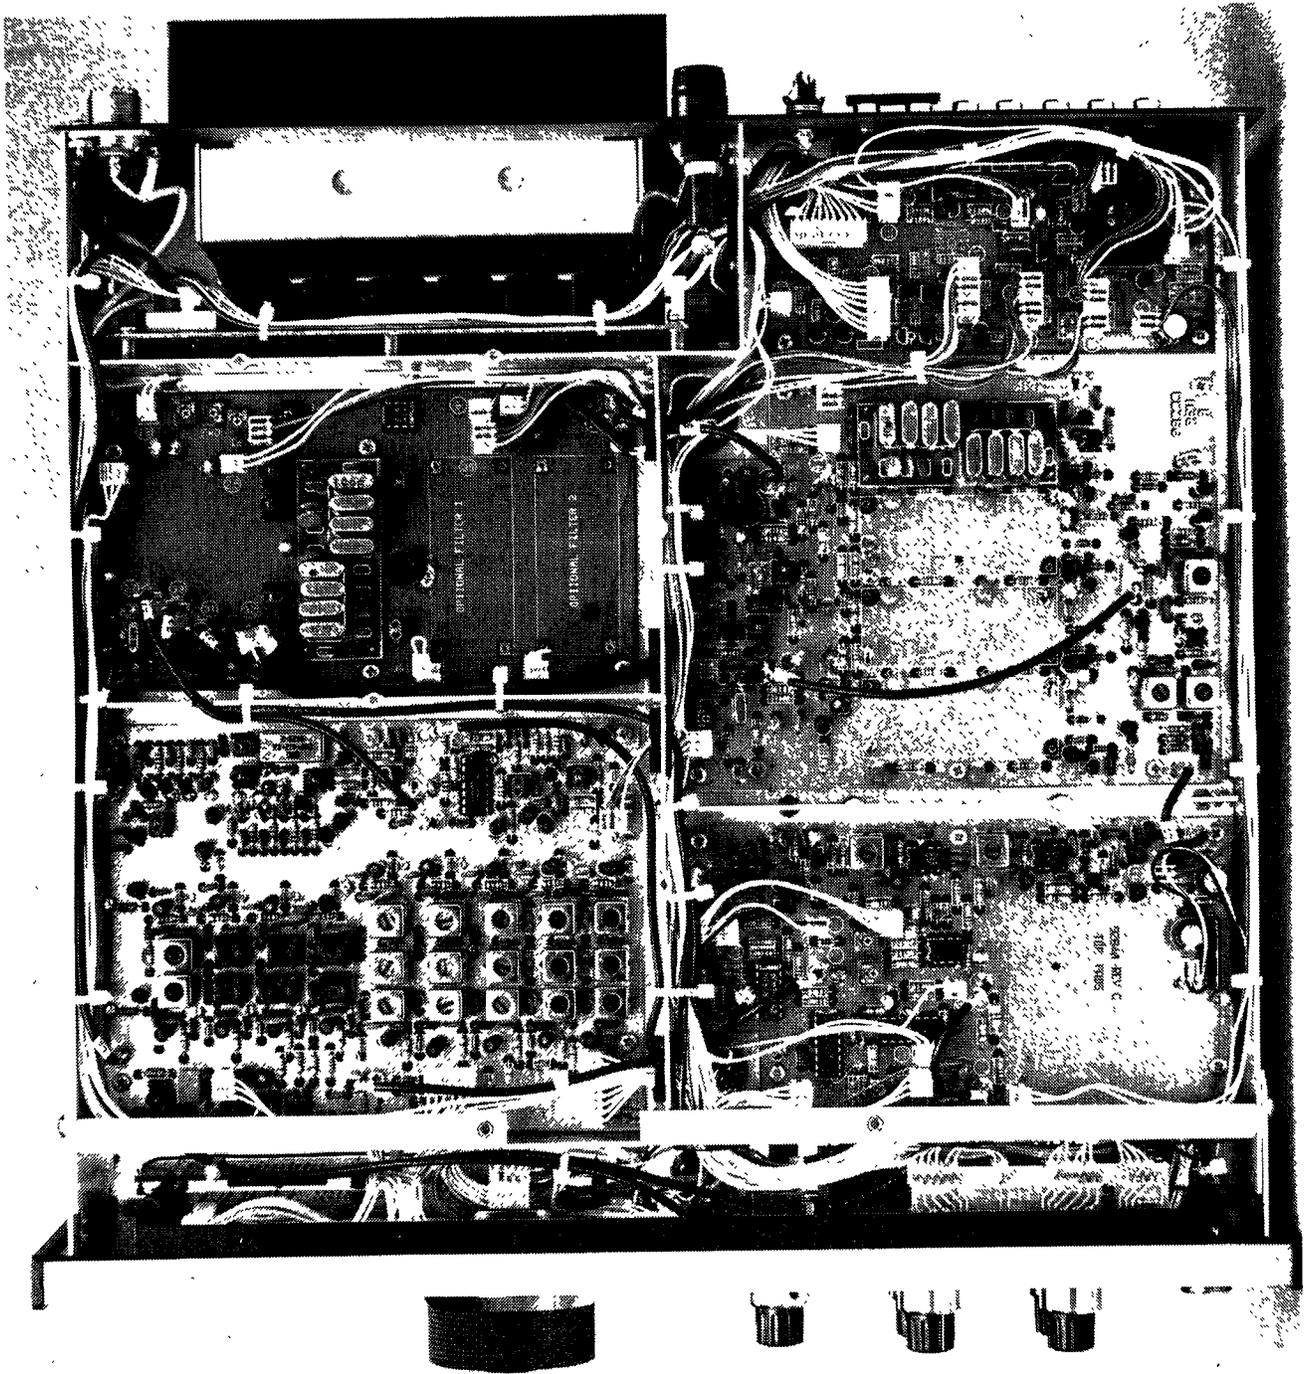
MODEL 564 BOTTOM VIEW
